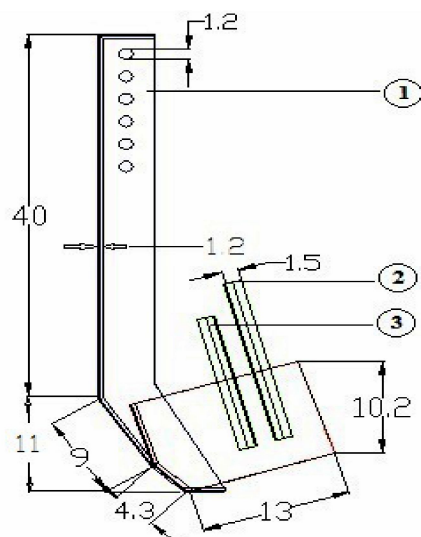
Reverse hoe-type furrow opener. (1. standard, 2. seed tube (2.5 cm dia), 3. fertilizer tube, 2.5 cm dia) [All the dimensions in cm]
